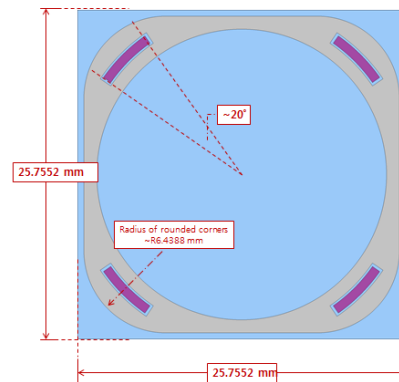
Pad-type BigT for the PLUS7 fuel assembly
